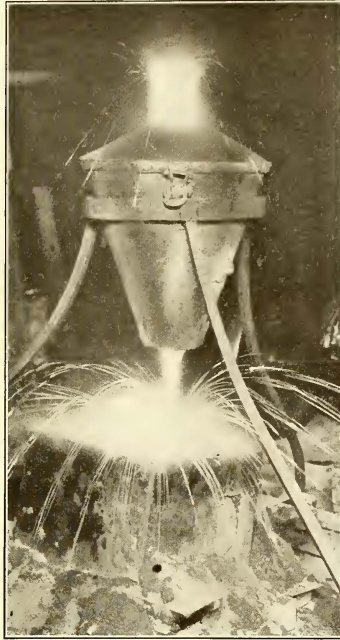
MAKING A WELD WITH THERMIT
